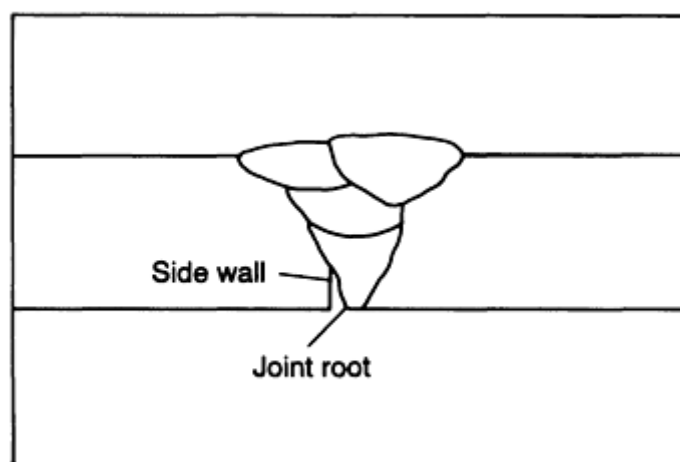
INCOMPLETE FUSION OF WELD METAL TO SIDE WALL AND TO JOINT ROOT
